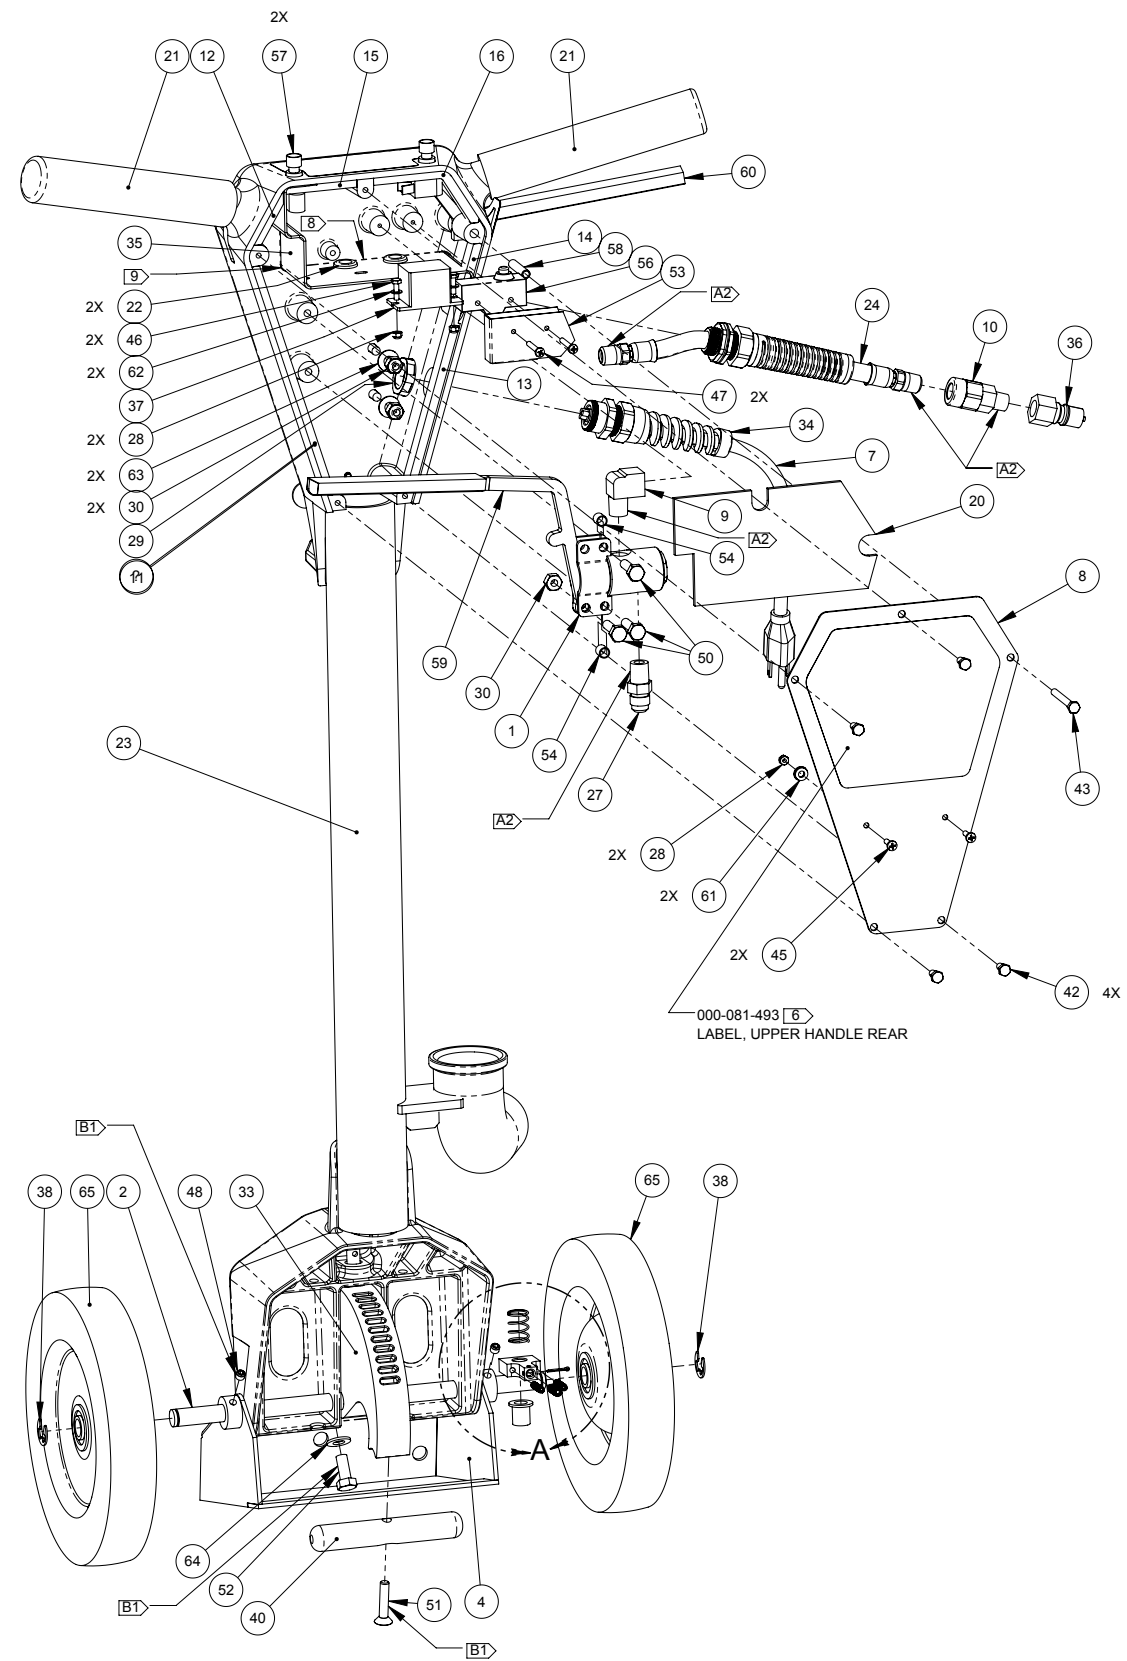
Upper and Lower Handle Assembly - View 2 of 3
